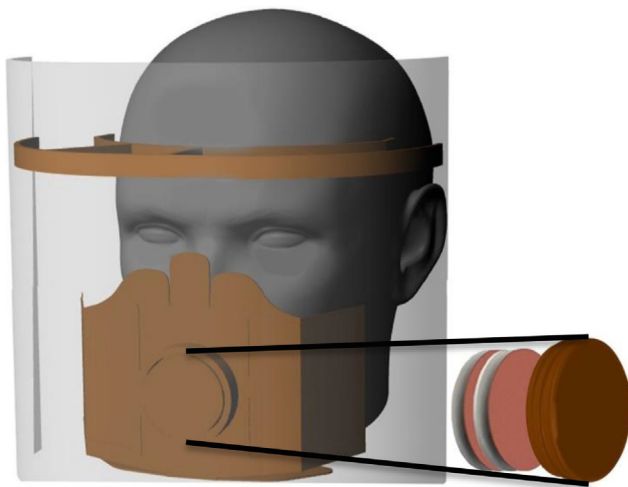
Mask and face shield assembly on head model. The projection of the internal arrangement between the mask and threaded plug is shown.
